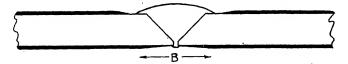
Cross-section of galvanized iron showing the effect of bronze-welding.
